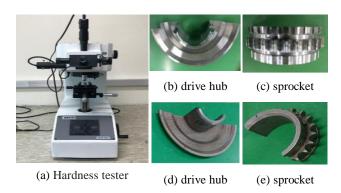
Hardness tester and specimen. (a): Hardness tester (MMT-X3), (b, C): drive hub and sprocket of before carburizing sprocket, (d, e): drive hub and sprocket of after carburizing.
